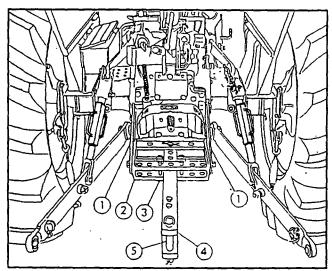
Rear-Mounted Hitch with Swinging Bar 1. Support Arm; 2. Drawbar Assembly; 3. Pin; 4. Drawbar; 5. Drawhook
